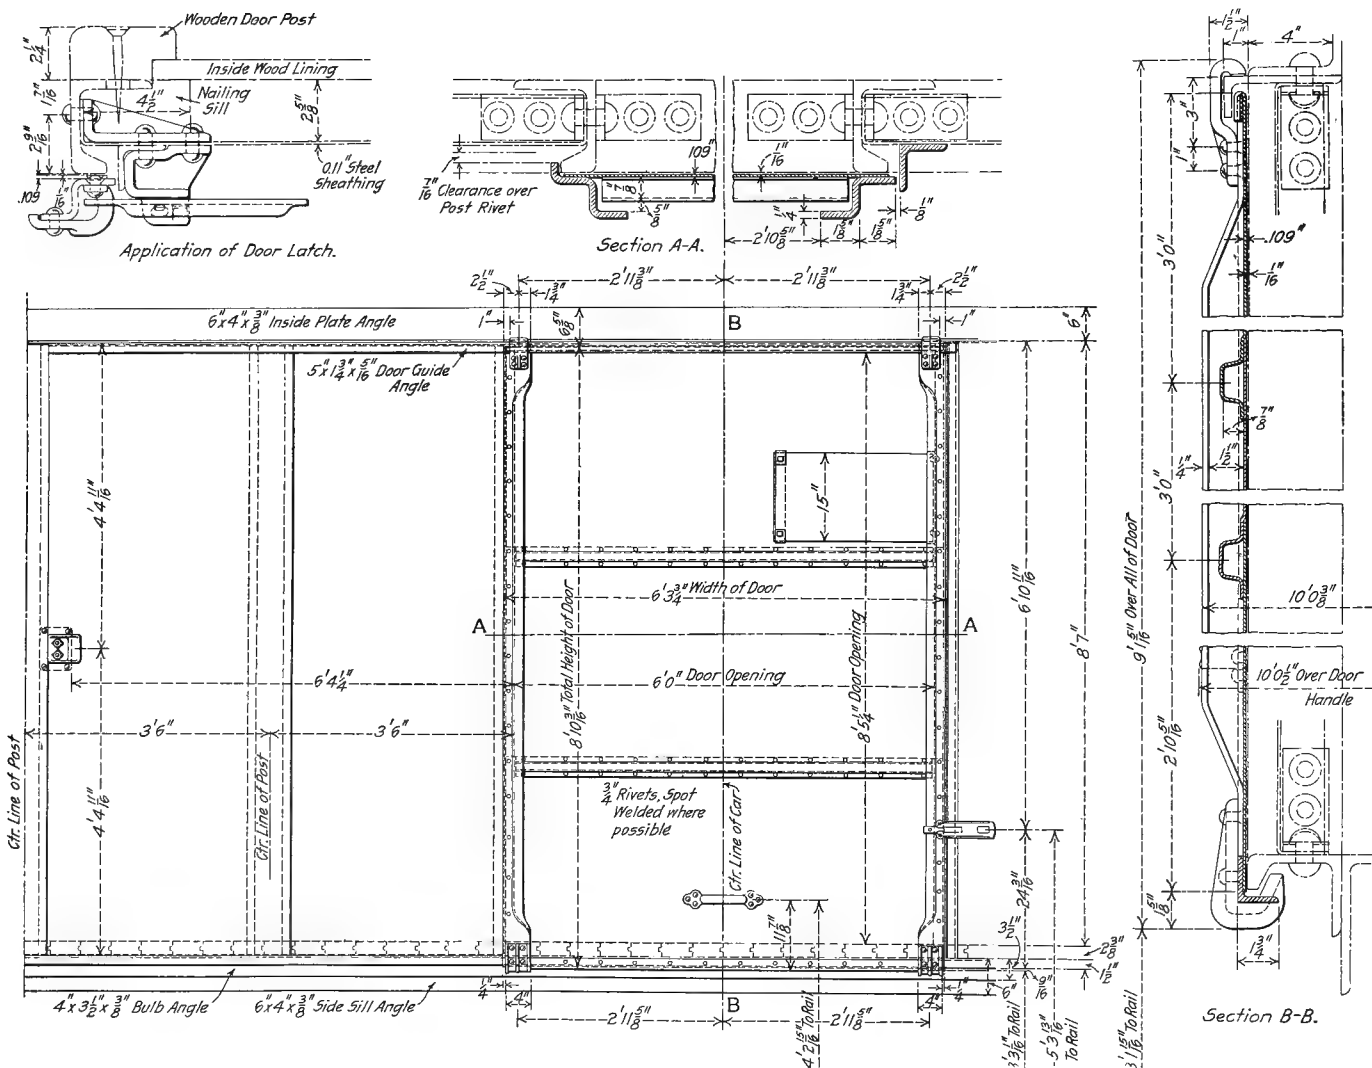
Side Door of Pennsylvania Railroad Steel Box Car Shown in Fig. 7.
